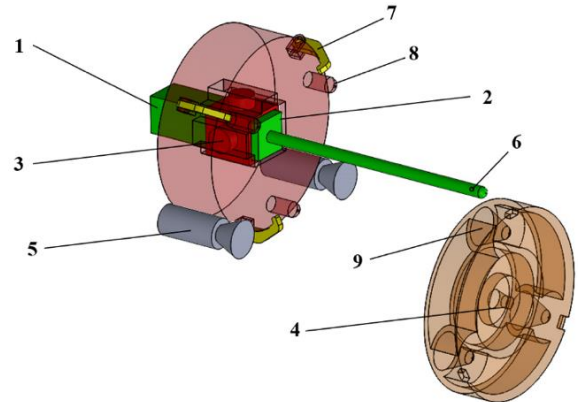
Central Active Mechanism functional mechanism. Linear actuator (1), universal joint (2), additional actuators (3), spherical joint (4), stereo-vision rig (5), spring-loaded elements (6), hooks (7), dampers (8), conical housing coupling devices (9).
